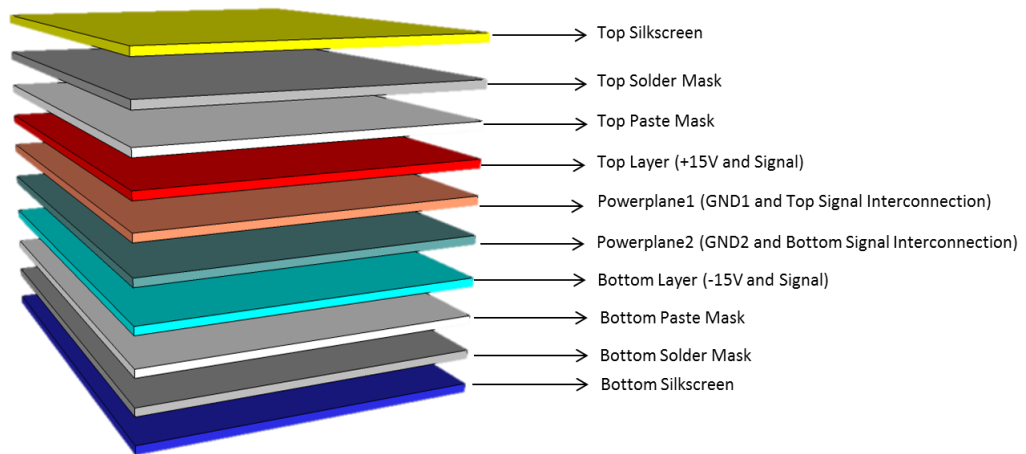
Demonstration of PCB layer specification for manufacturing.
